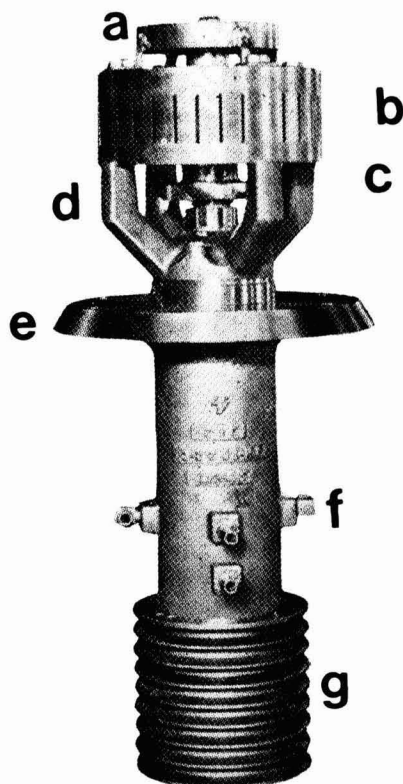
Kady mill, dispersion head and drive, (a) upper shroud and propeller, (b) main dispersion head containing rotor and stator, (c) main working seal, (d) bottom feeding propeller, (e) tank bottom mounting flange, (f) bearing and seal housing, (g) driven shaft
